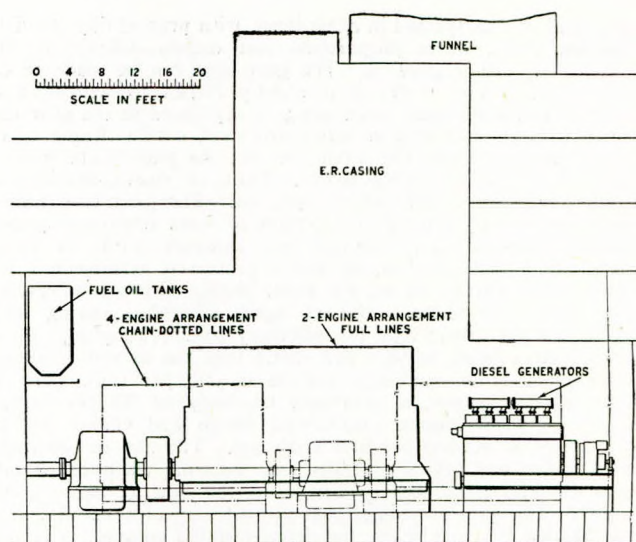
Twin-screw ship; two- and four-engine drive.
